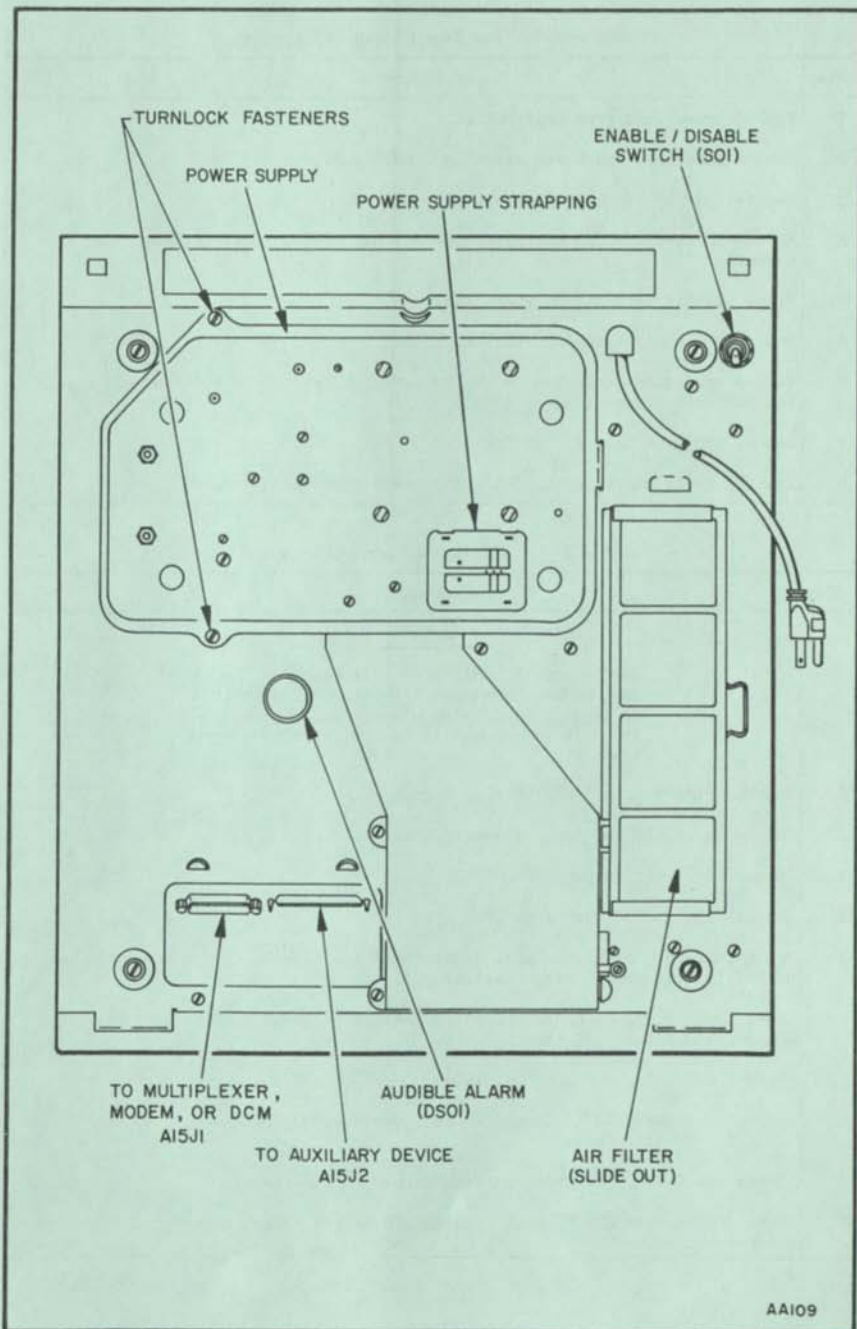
UNISCOPE 100 Display Terminal Bottom View
